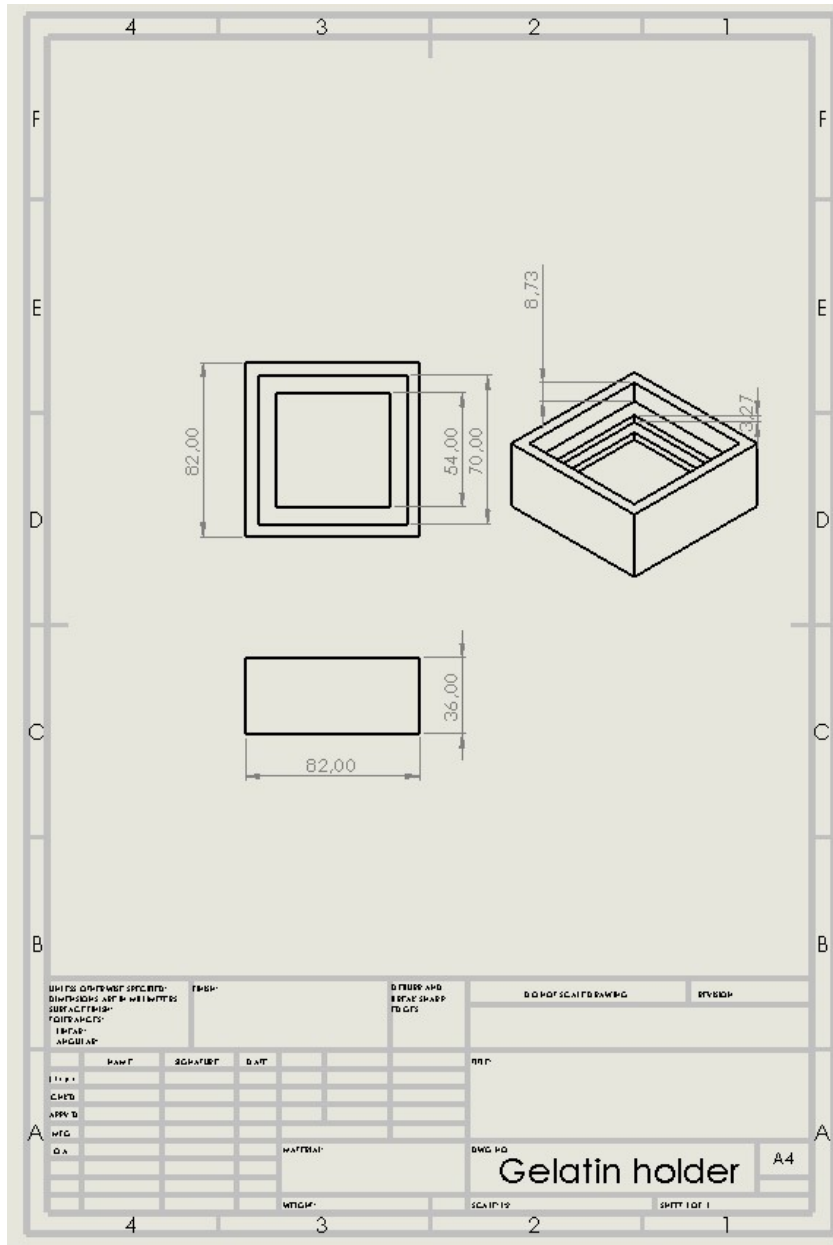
This container holds the gelatine that is used during testing. During curing, a mold is placed on top this container with the correct curvature. This mold is then removed.
